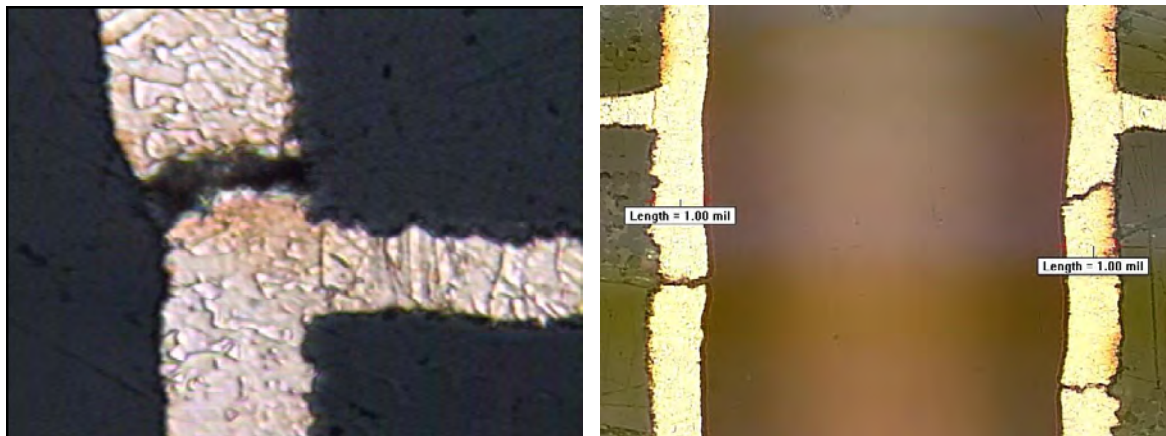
Close-up of PTH cross-section (left); wider view on right. Clearly, barrel cracking is the failure mode.
